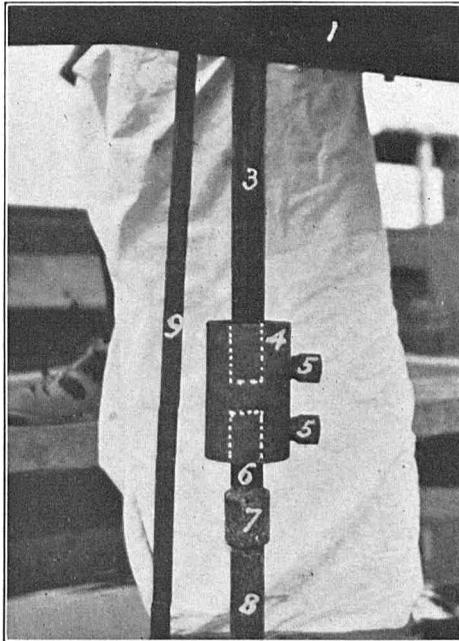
Detail of propeller shaft couplings. 1, underside of shaft beam; 3, upper steel portion of shaft, which bears gear on top and enters sleeve coupling below; 4, cast sleeve coupling; 5, set screws holding shafts in coupling; 6, short piece of steel shaft; 7, pipe coupling; 8, lower part of shaft, made of pipe; 9, measuring stick, made of sections 6 inches long.
